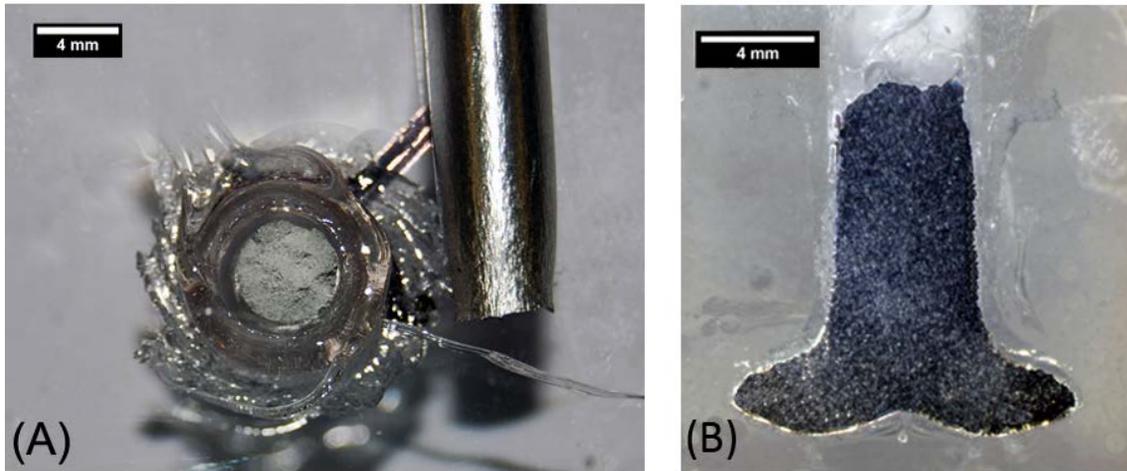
Type-I fracture observed in joining Condition 8. (A) Specimen after tensile T-Pull testing. (B) Cross-sectional view of the fractured specimen.
